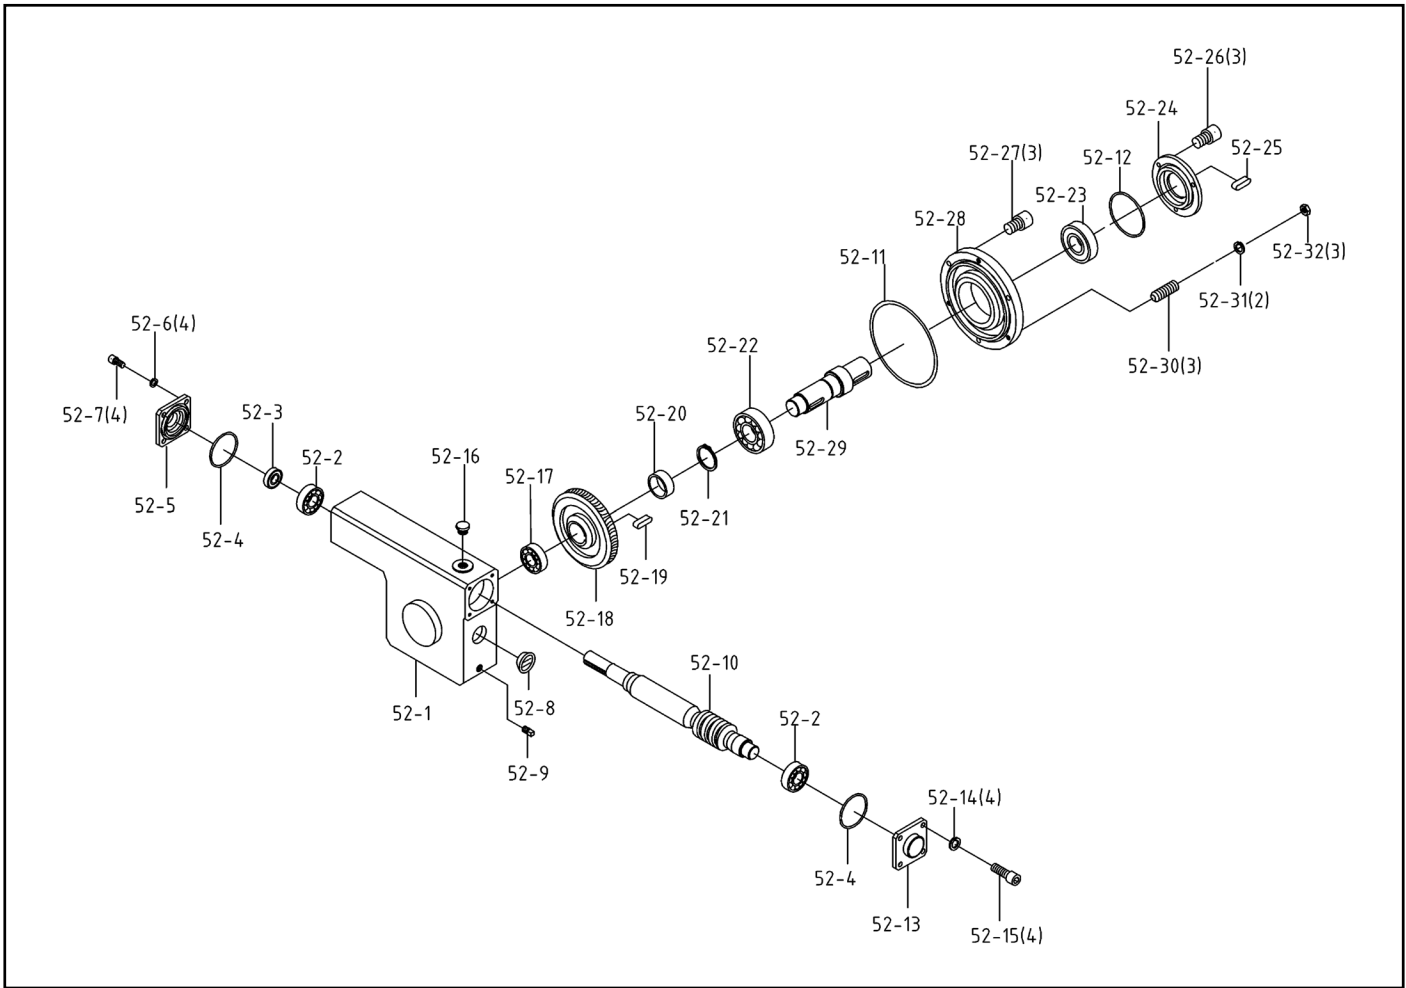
Exploded View of the VSF-14 Gear Box Assembly
